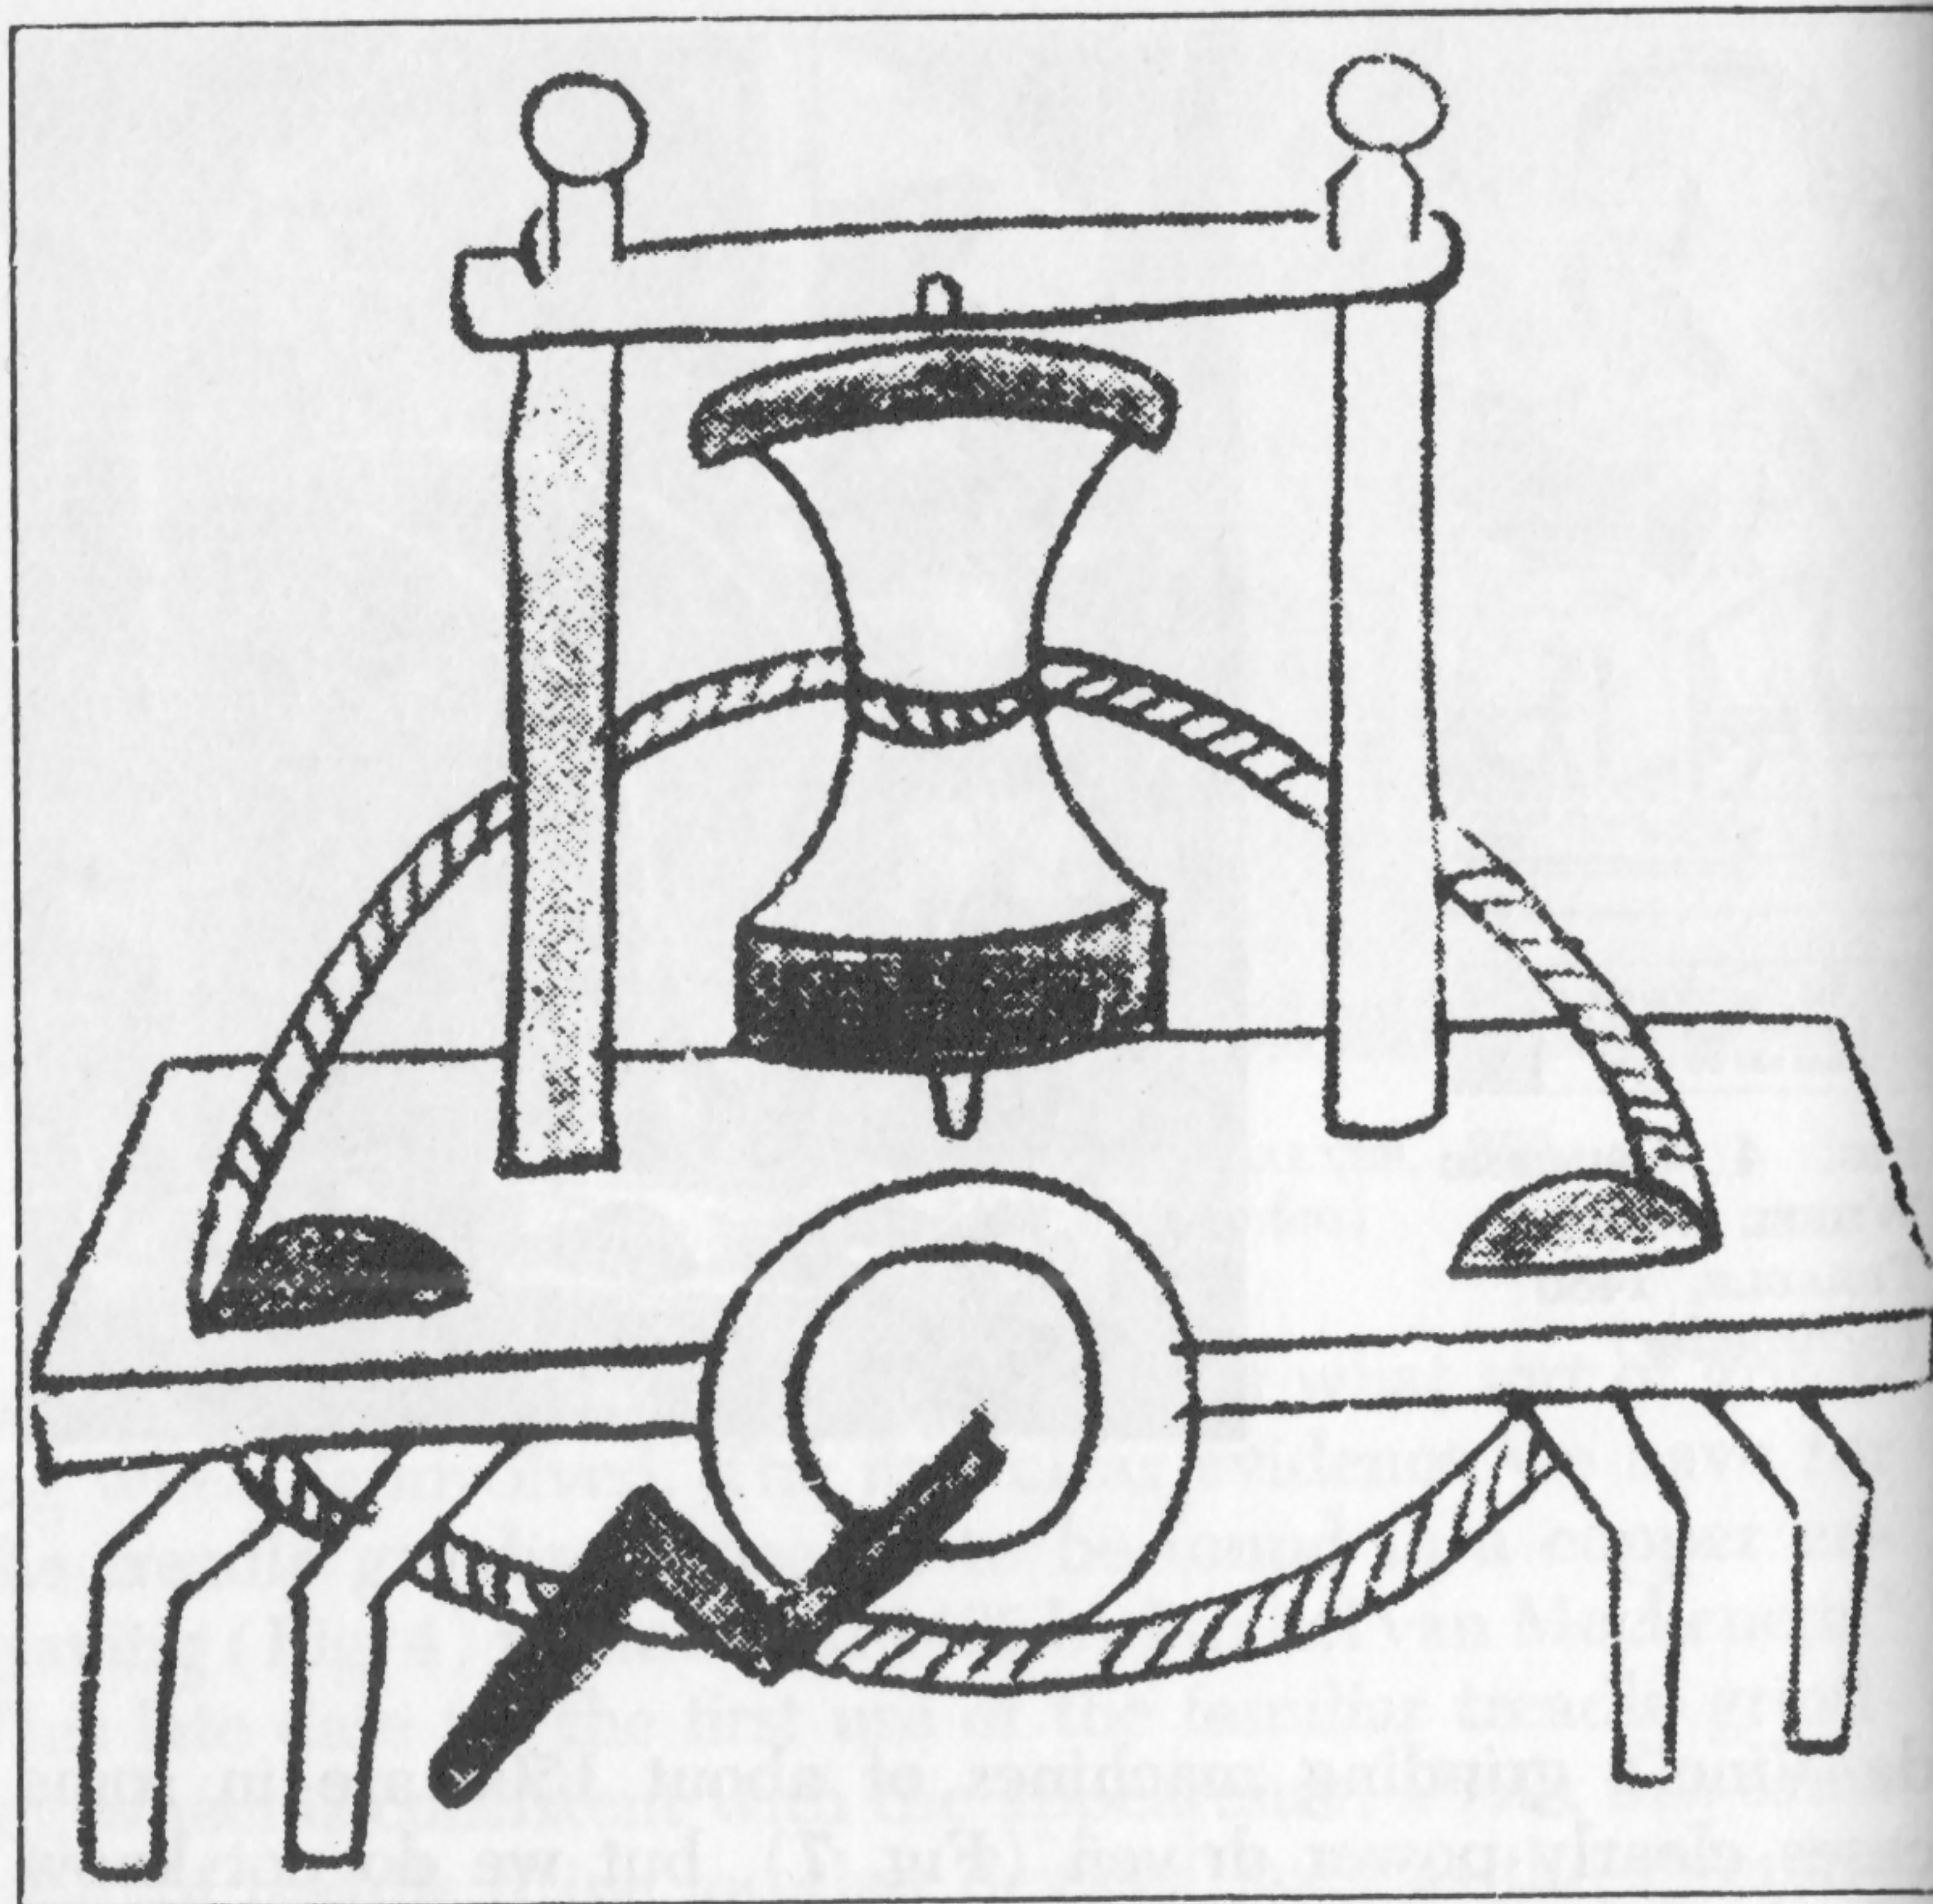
GRINDING MACHINE OF ABOUT 1430 (Schroeder)
